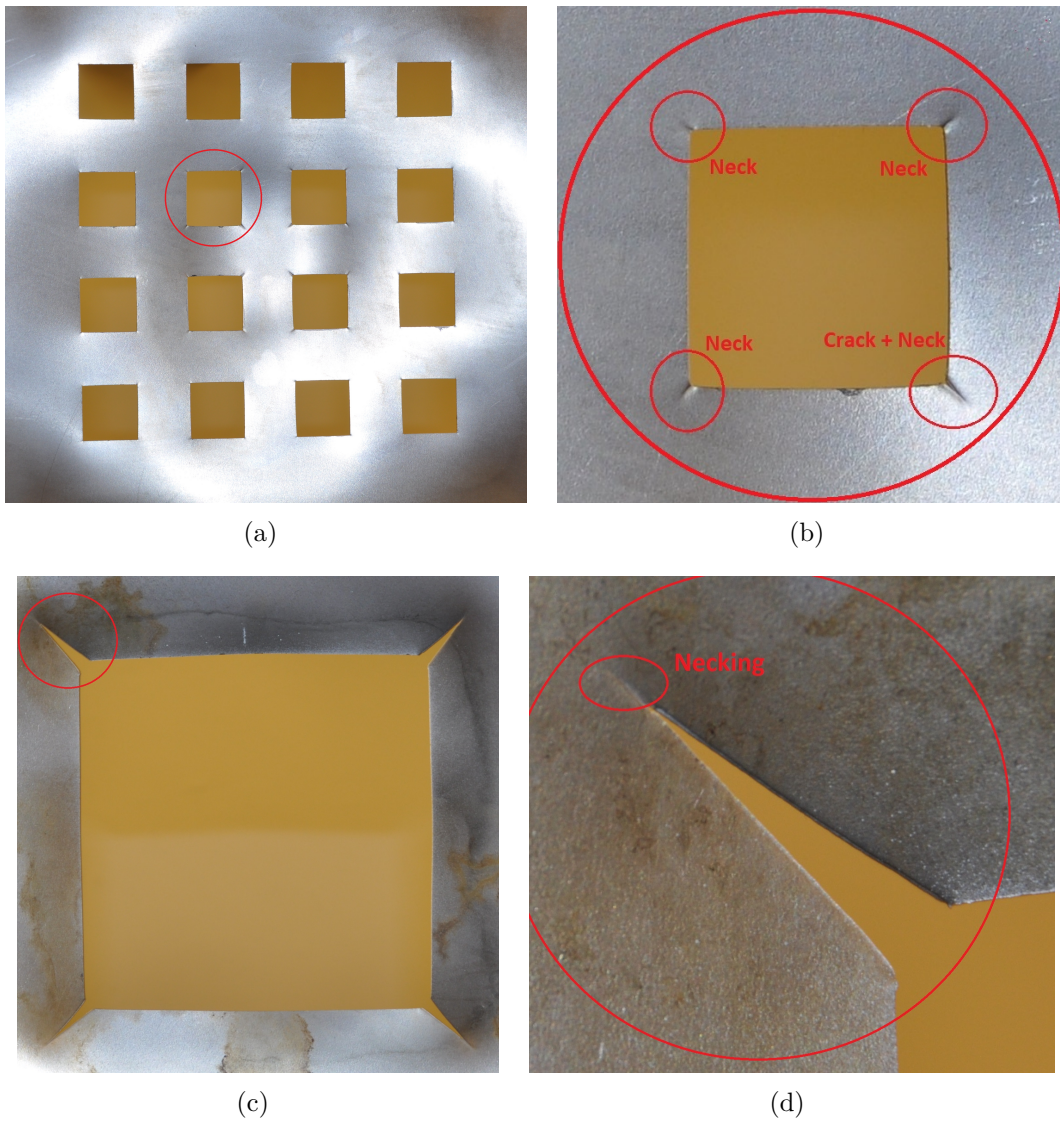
Images identifying cracks and necking for P3.25 and P1.15. (a) P3.25 showing both cracks and necking, (b) Zoomed image of cracks and necking for P3.25, (c) P1.15 showing cracks with necking at the tip, (d) Zoomed image of the combination of a crack and necking for P1.15.
